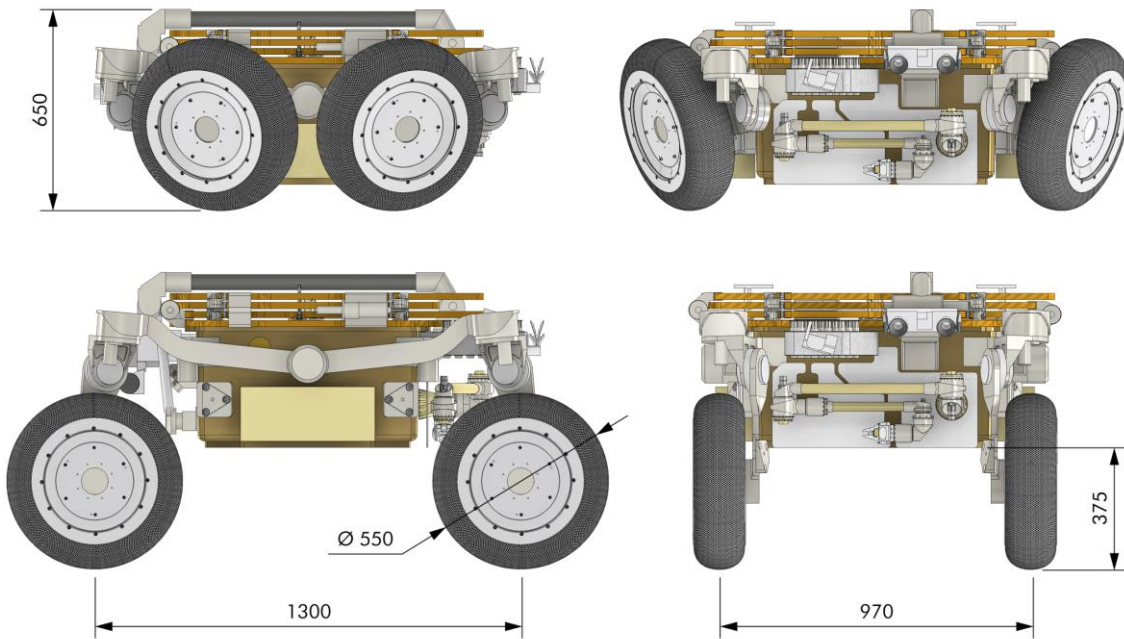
FAST stowed and deployed, side views (left) and front views (right) with salient dimensions in mm
